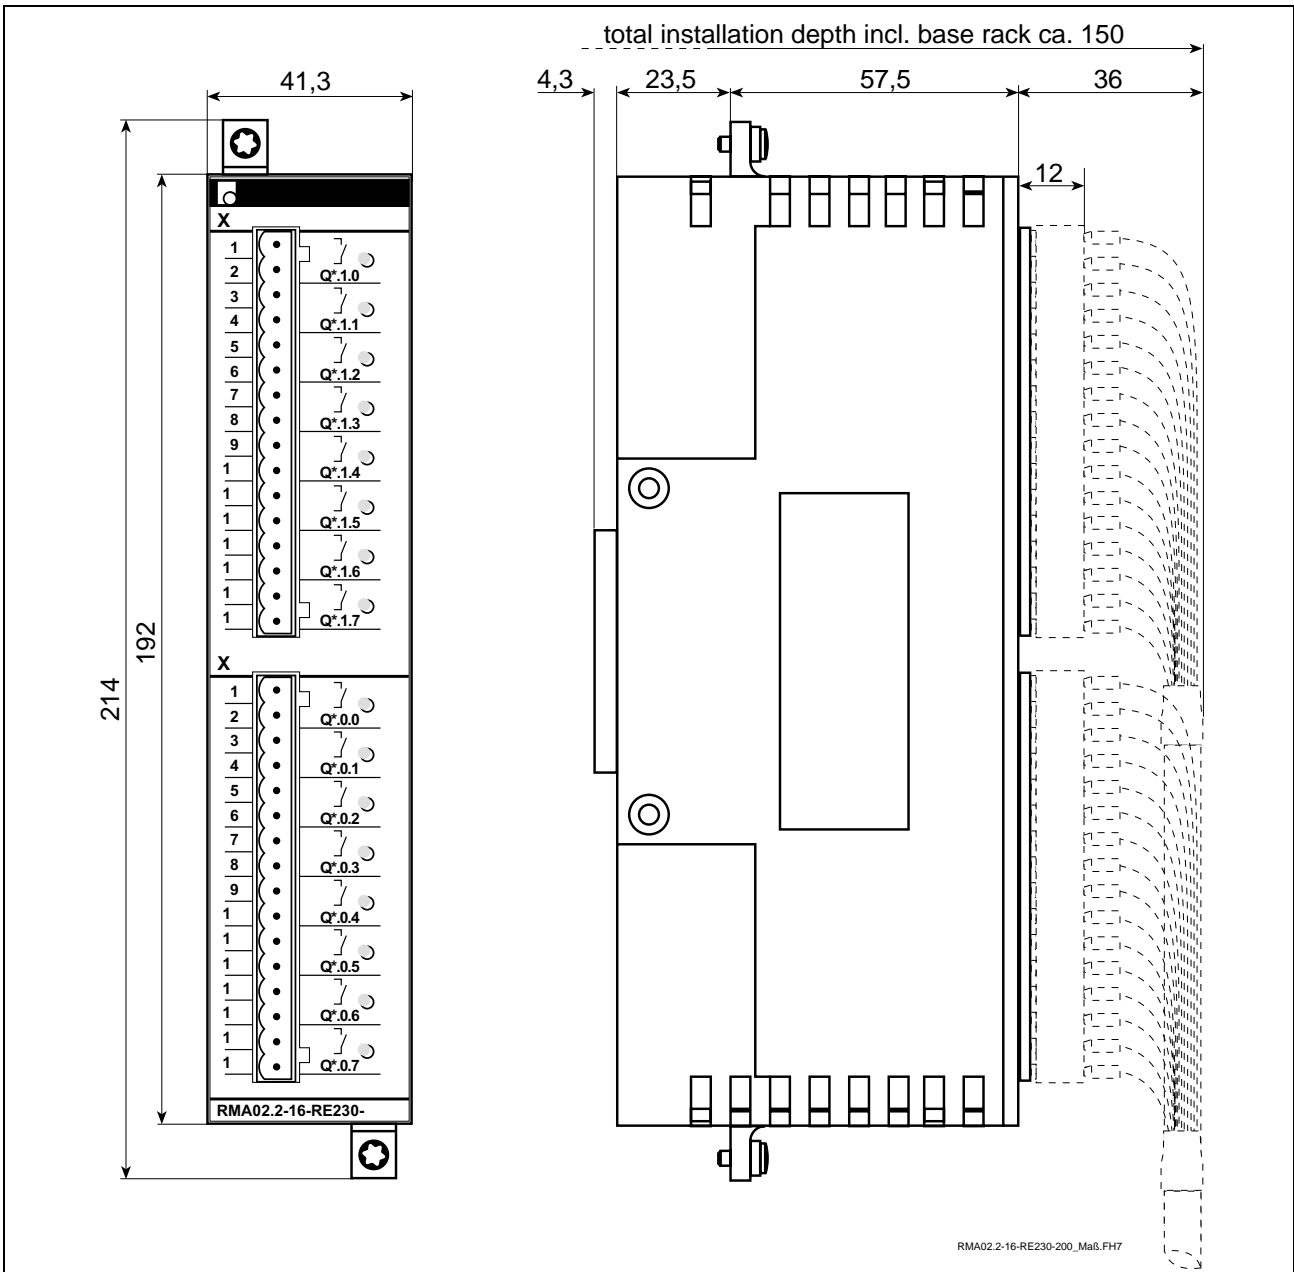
Mounting dimensions RMA02.2-16-RE230-200
